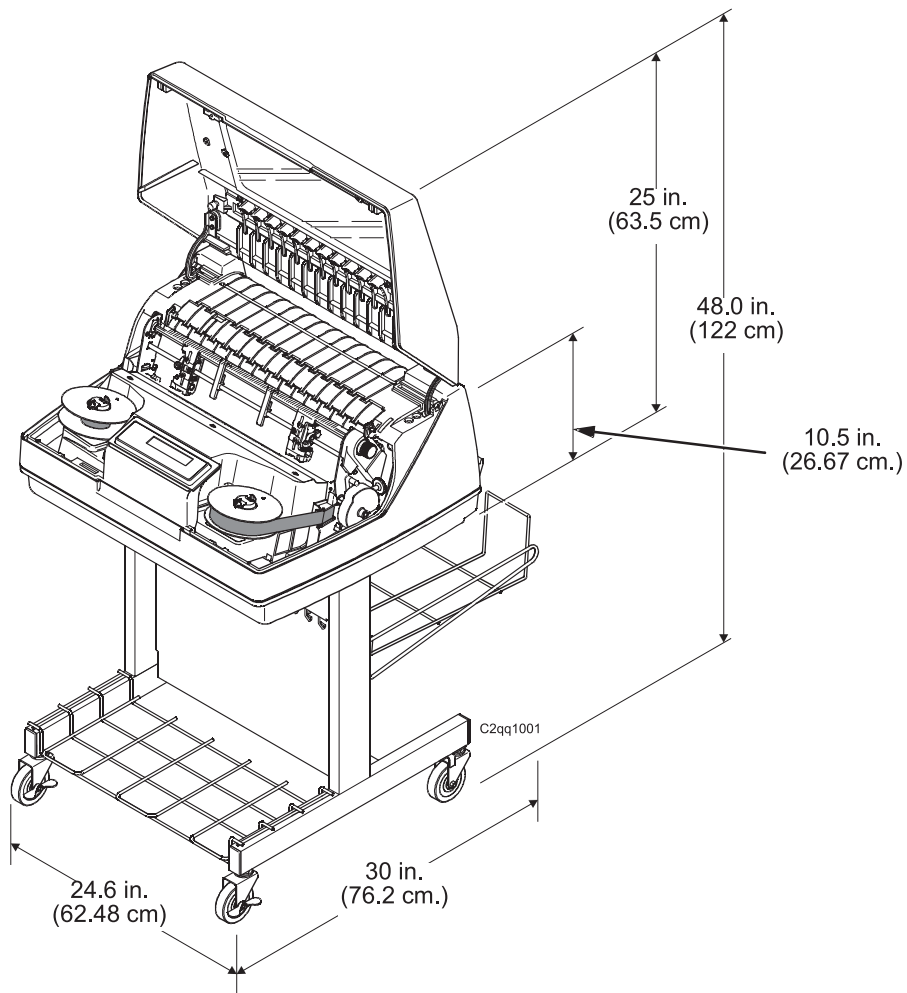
Exploded View of Pedestal Model Printer Dimensions
